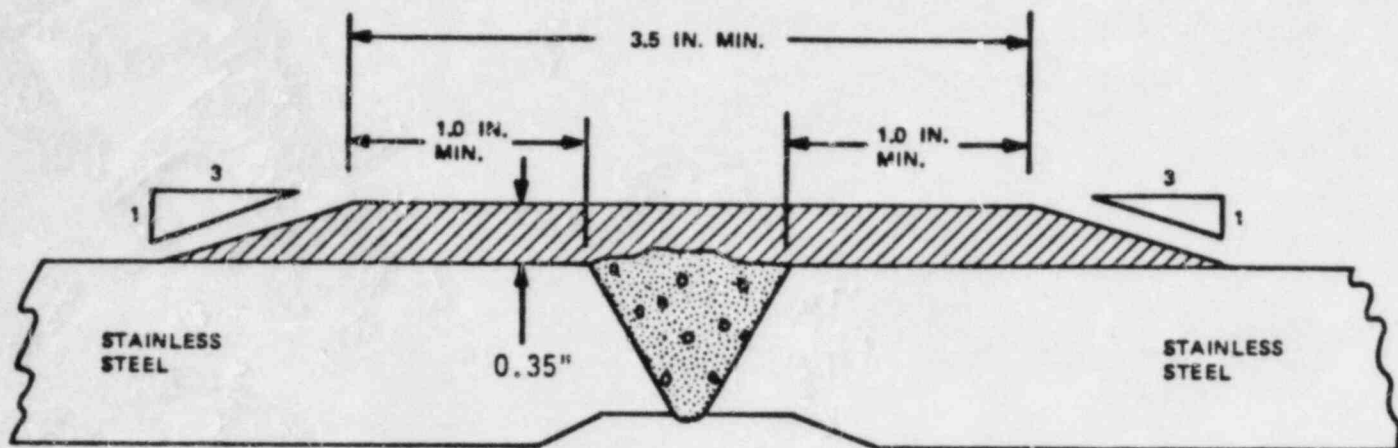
Recommended Weld Overlay Design for Weld 10-0-2.
